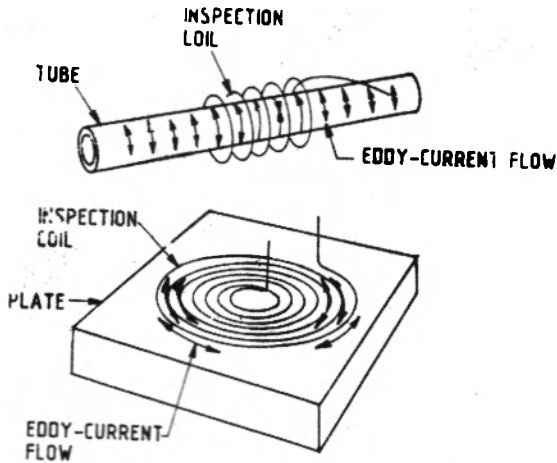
Two common types of inspection coils and the patterns of eddy-current flow generated by the exciting current in the coils. Solenoid-type coil is applied to cylindrical or tubular parts; pancake-type coil, to a flat surface
